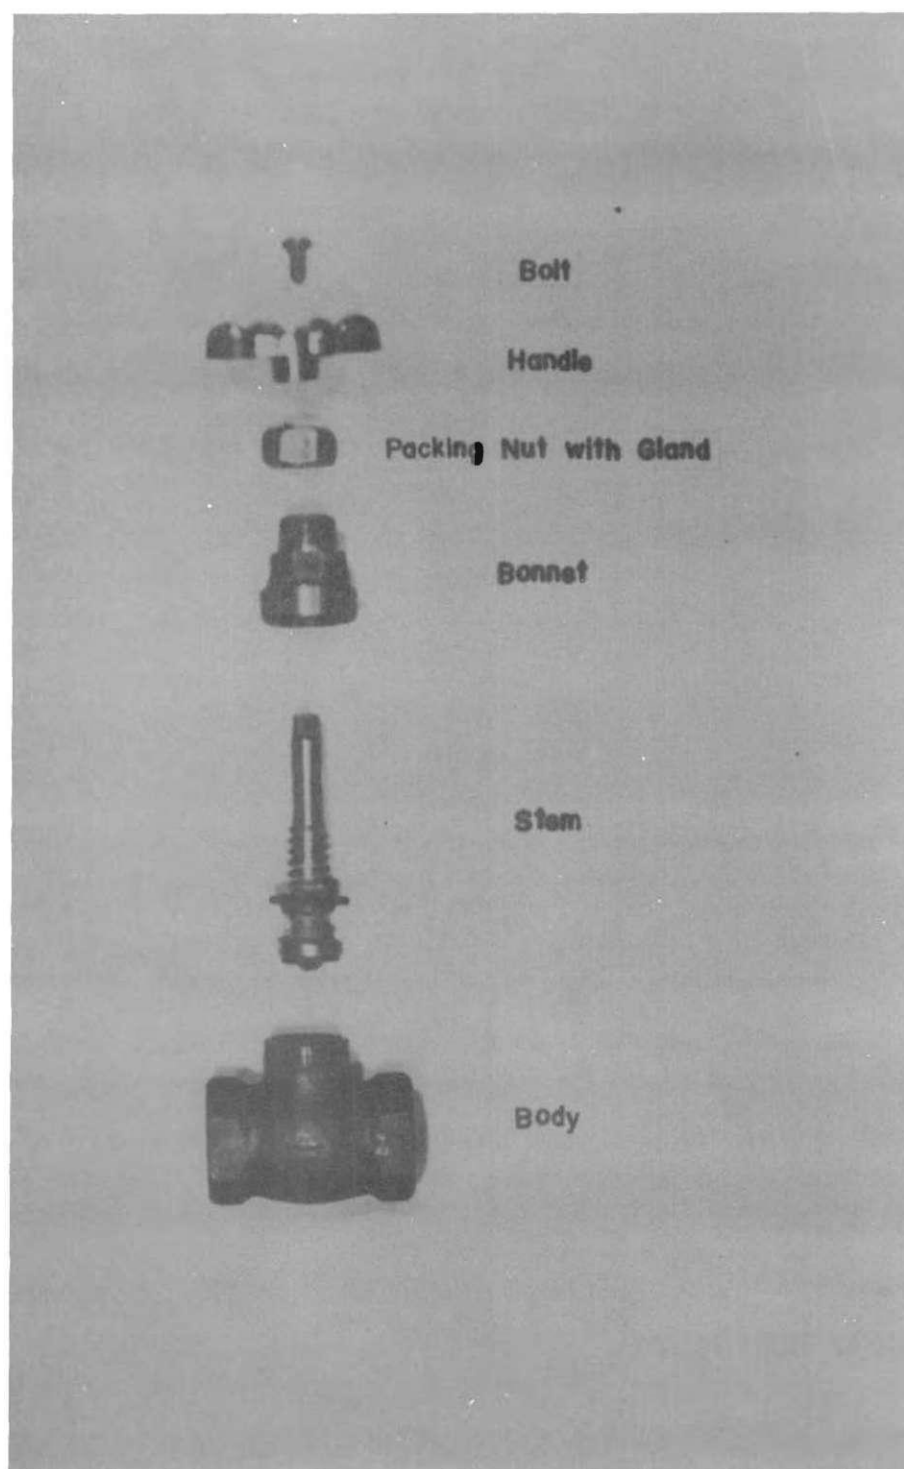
Exploded View of Three-quarter Inch Globe Valve Used in Stage Three Operation. Picture is approximately one-half true size.
